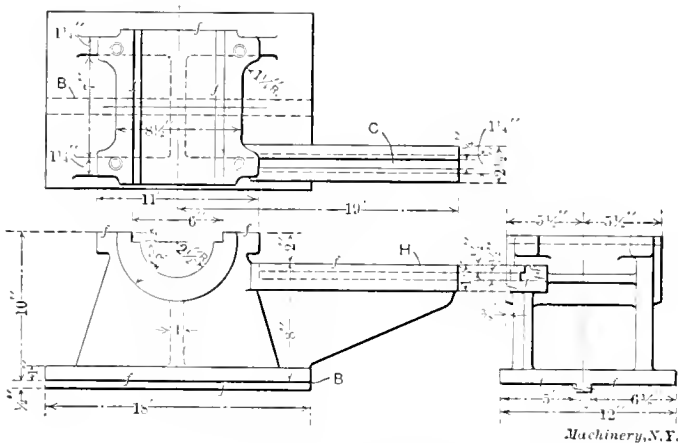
Elevations and Plan of Milling Machine Fixture Casting.
